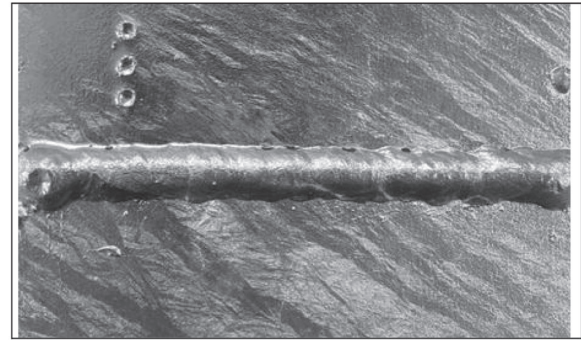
a. and 11 b. show the appearance of the weld seam before and after hot-dip galvanizing of two S355 steel plates, 8 mm thick, which were joined by GMA welding using the filler metal G42 3 M21 3
